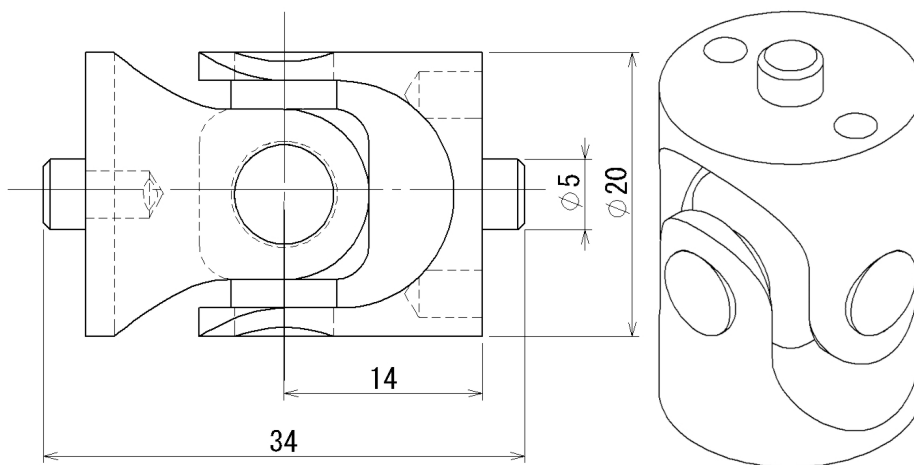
Assembly drawing and isometric view of upper passive joint for WL-16.
